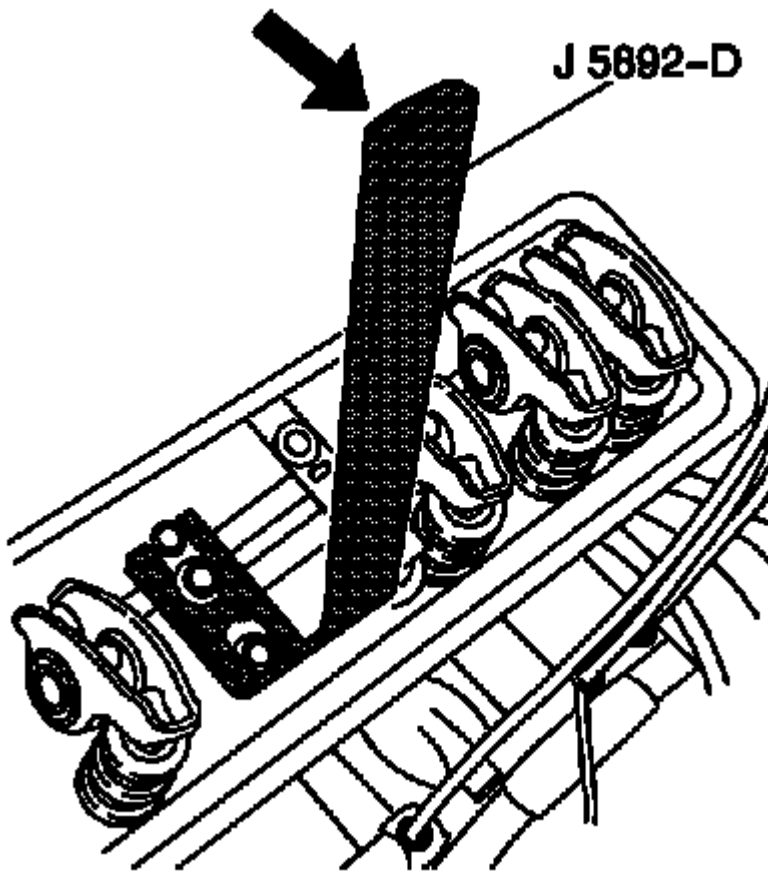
View Of Special Tool J 5892--D, Valve Rocker Arm Bolt & Washer
